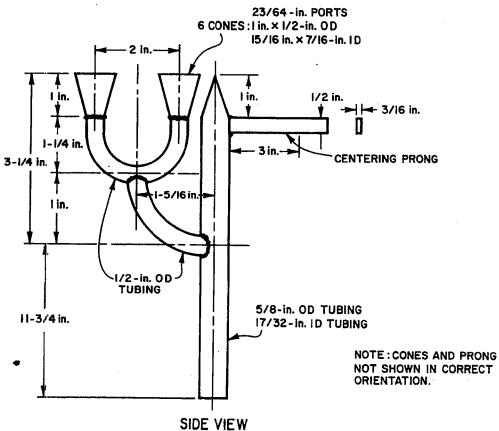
15. DIMENSIONED DIAGRAM OF SIX-CONE FEED GAS DISTRIBUTOR
